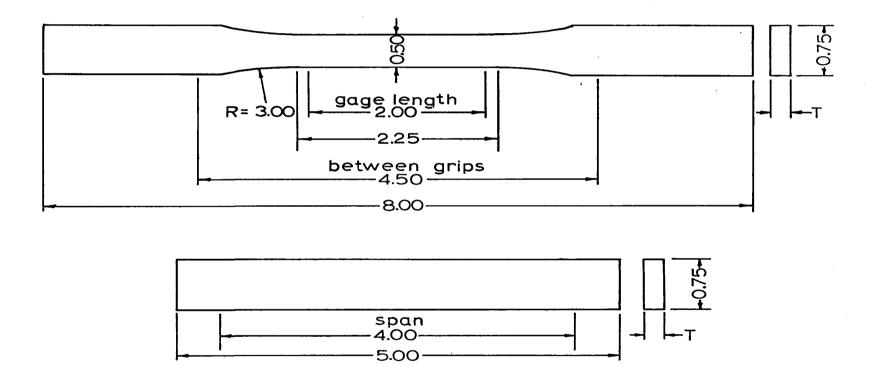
TENSION & FLEXURE SPECIMENS (F.S.)
